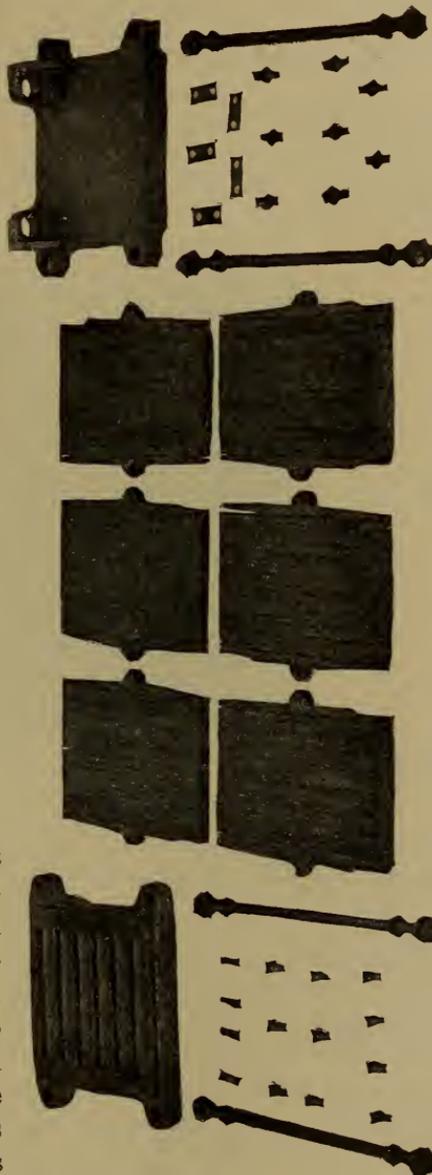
Exploded View of “PR” Rheostat. Gen. Elec. Co.
